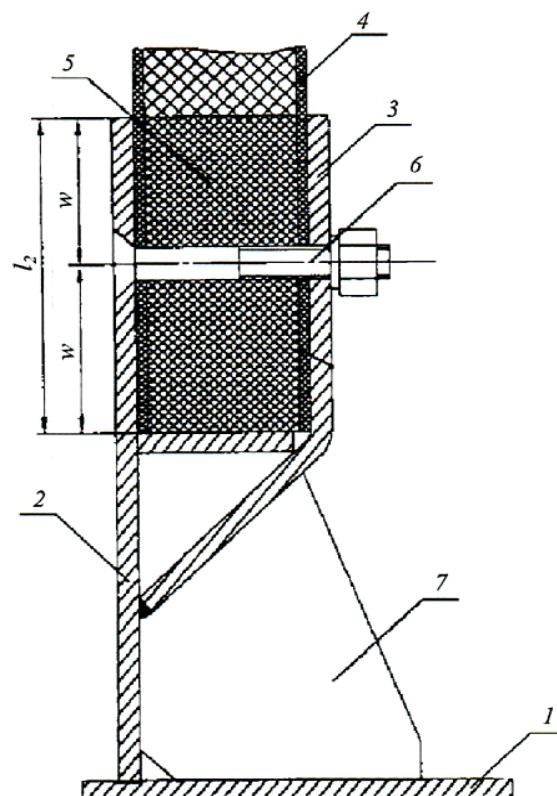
Bonded and bolted joint of the bulkhead to the metal hull (with one metal coaming):
